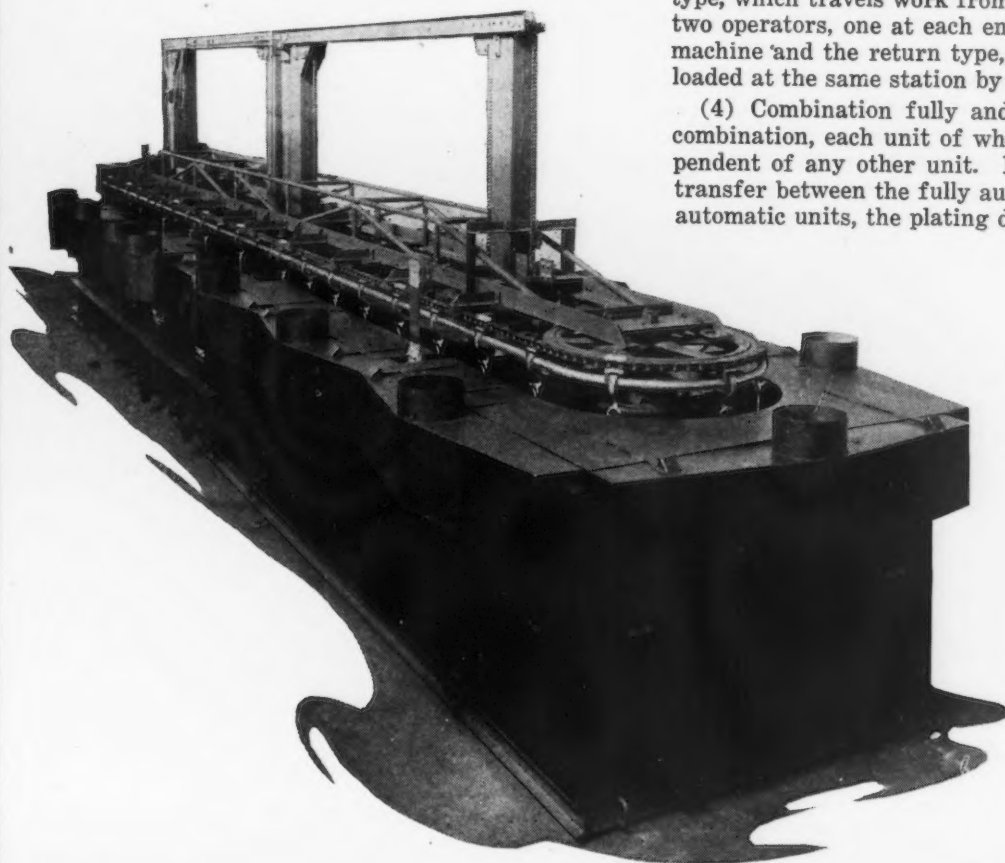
A full automatic plating conveyer manufactured by Udylyte.
